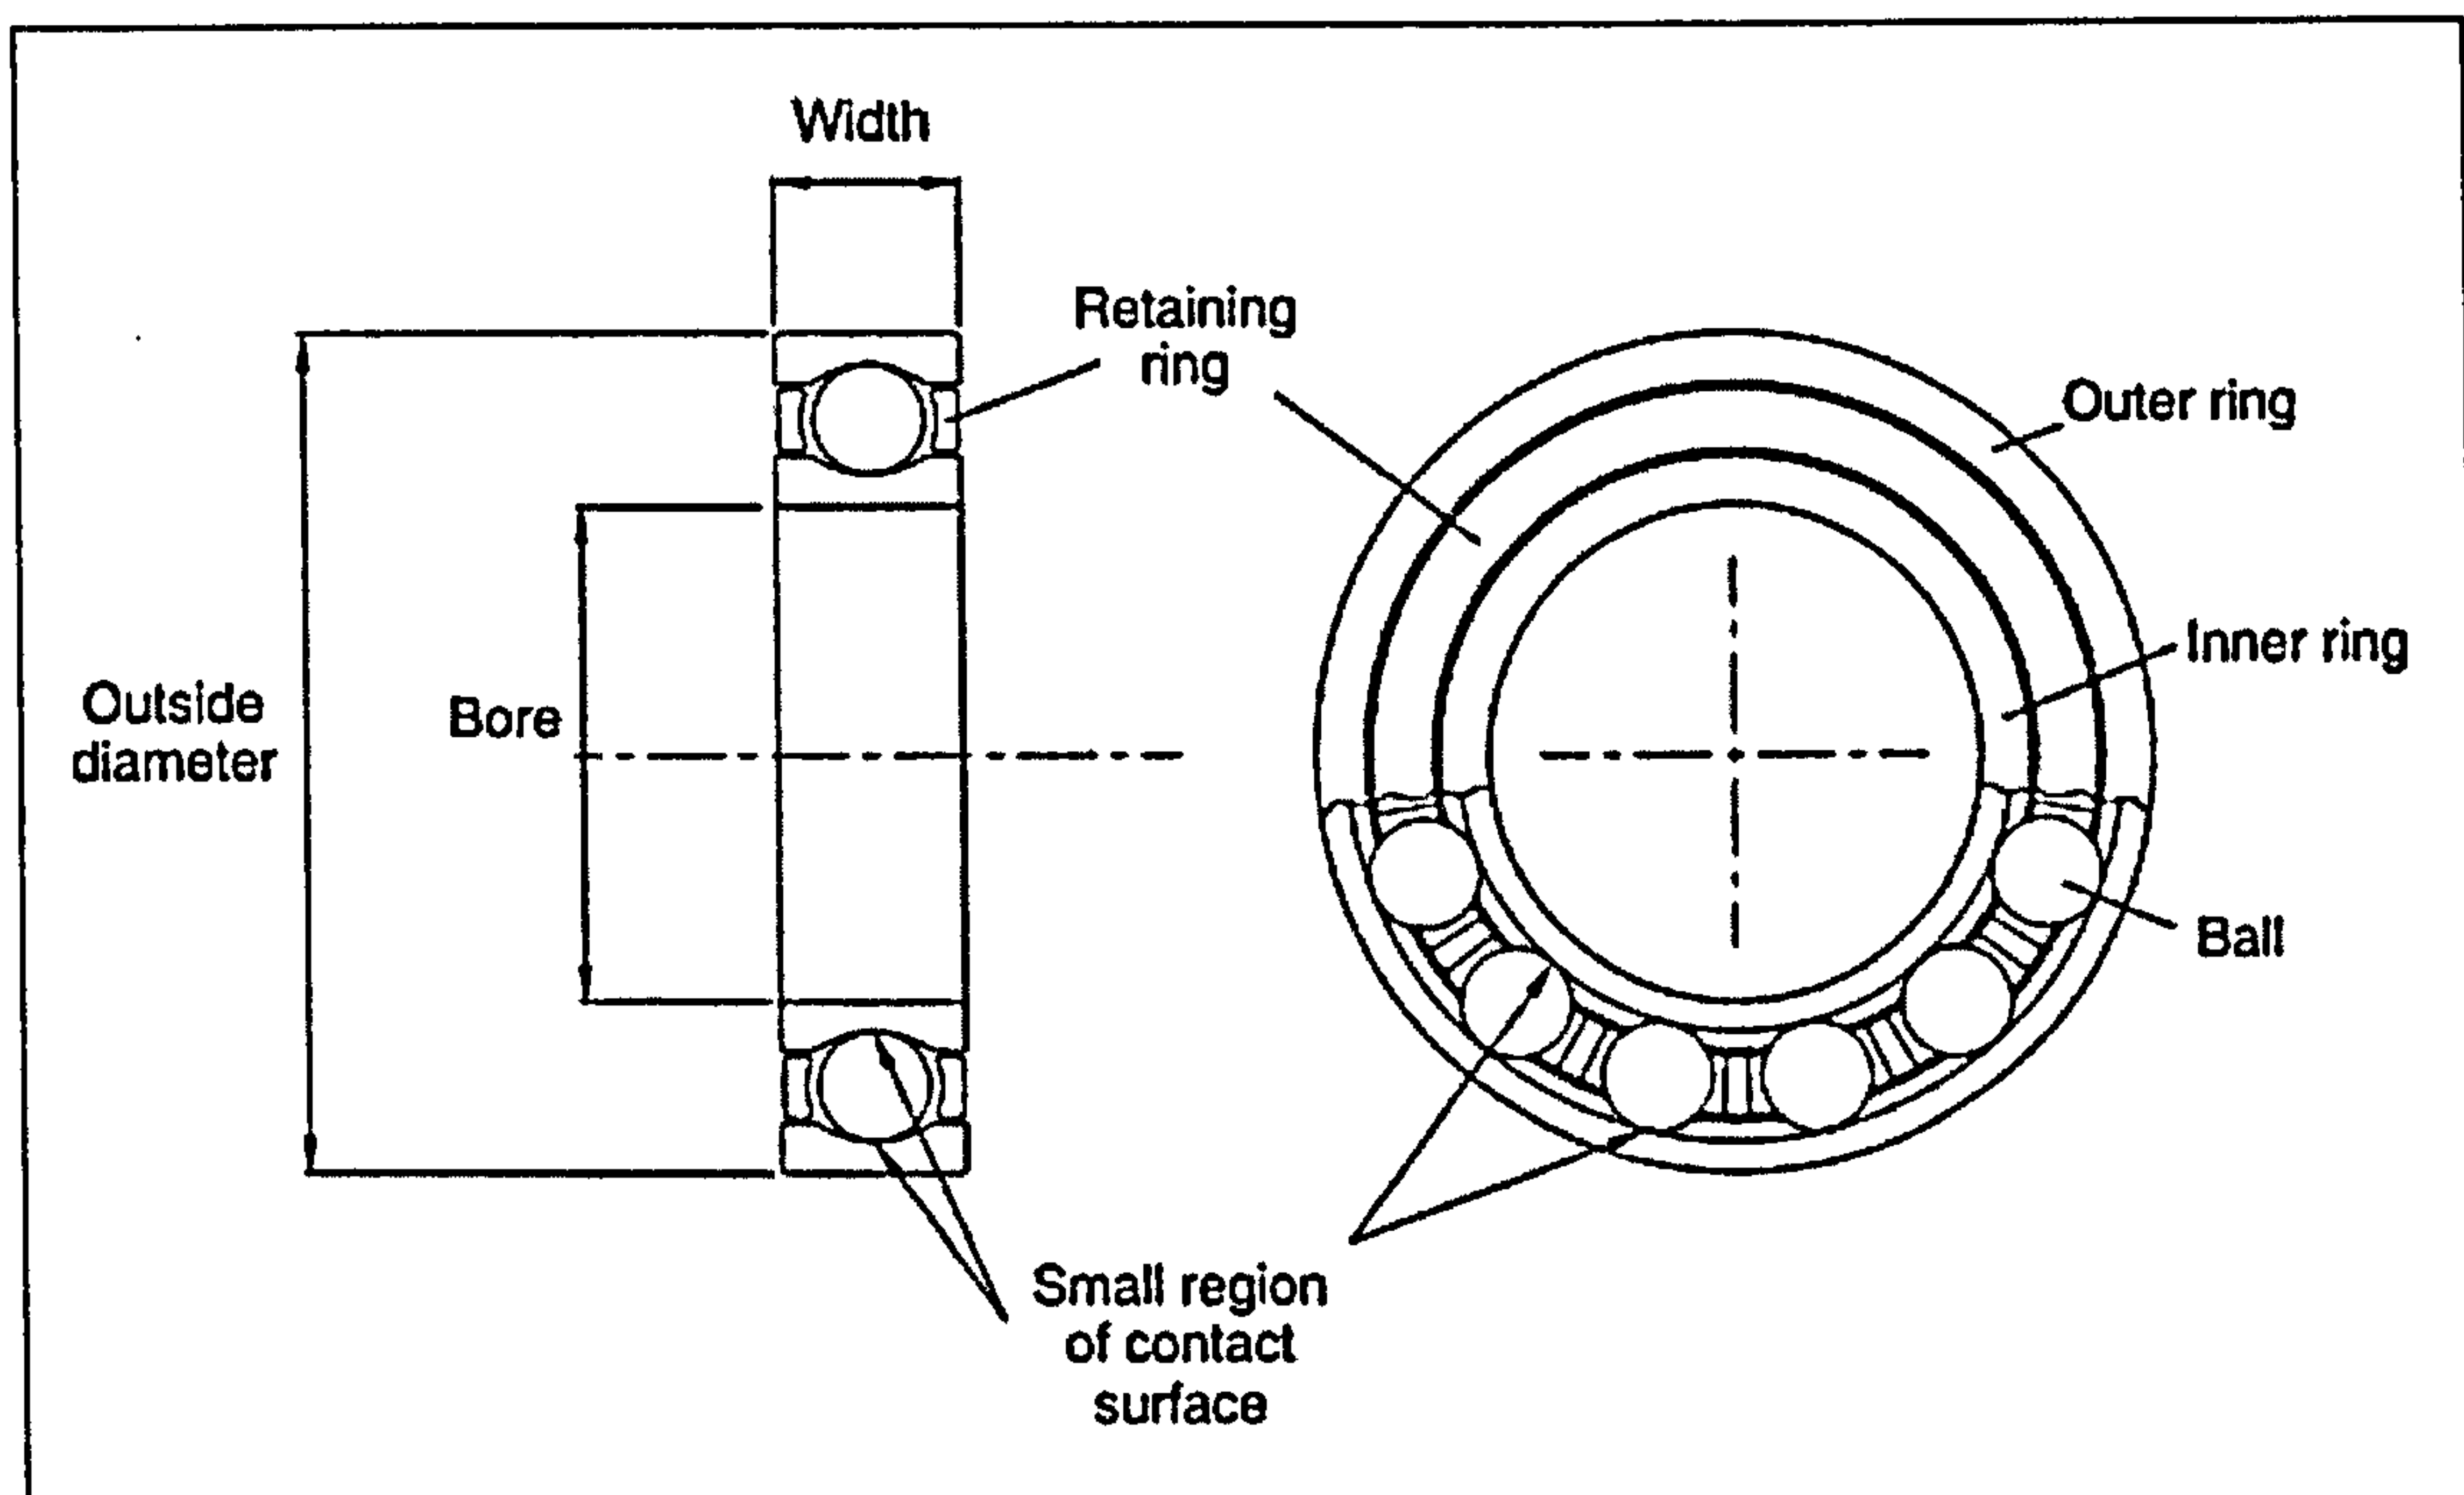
Typical rolling-element bearing (ball bearing) elements. Sketch reproduced from reference [17].
